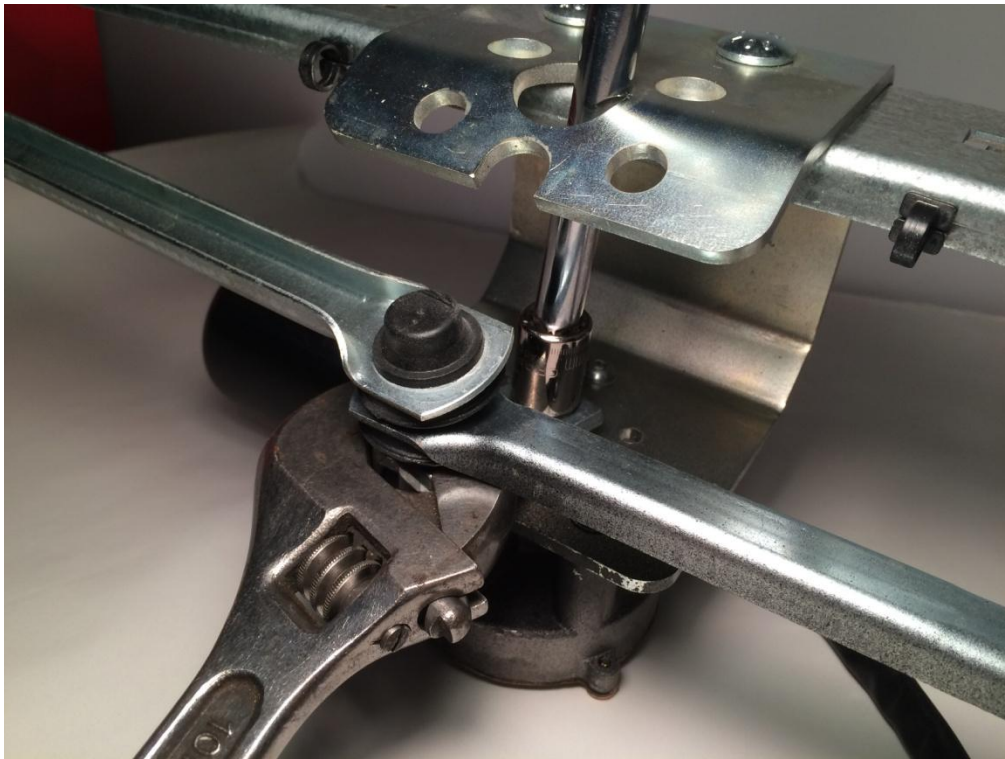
Crank rotated to 6 o'clock and restrained for nut removal
